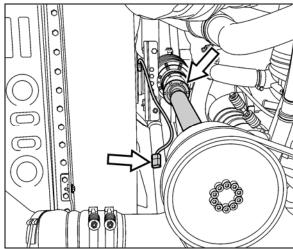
DISCONNECTING FAN DRIVE SHAFT
